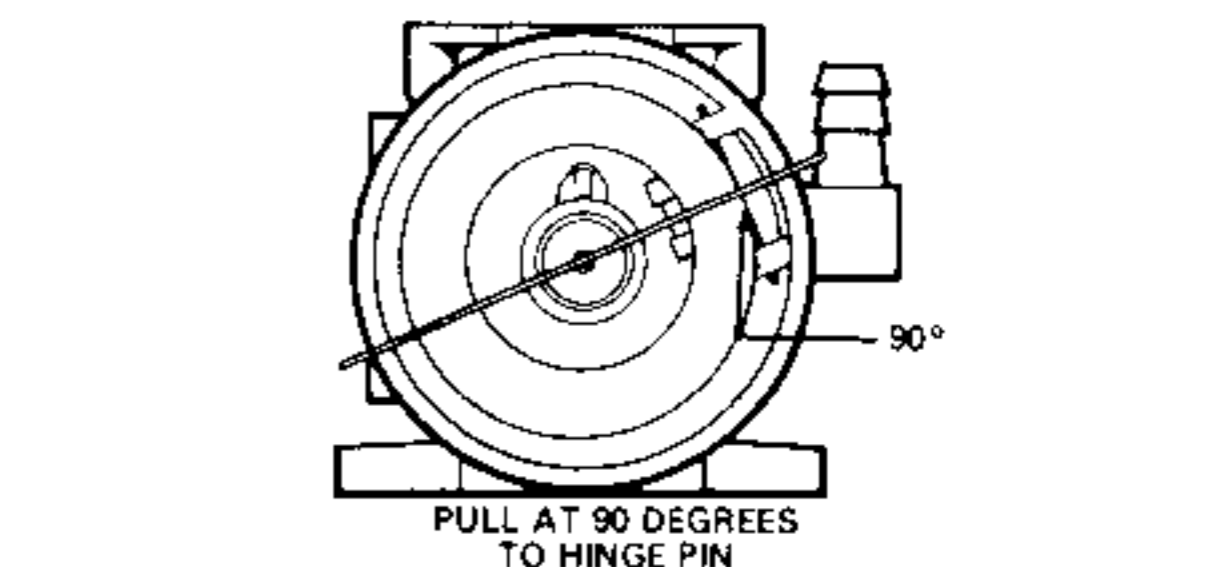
View of carburetor float assembly showing correct installation of fuel inlet needle clip.
